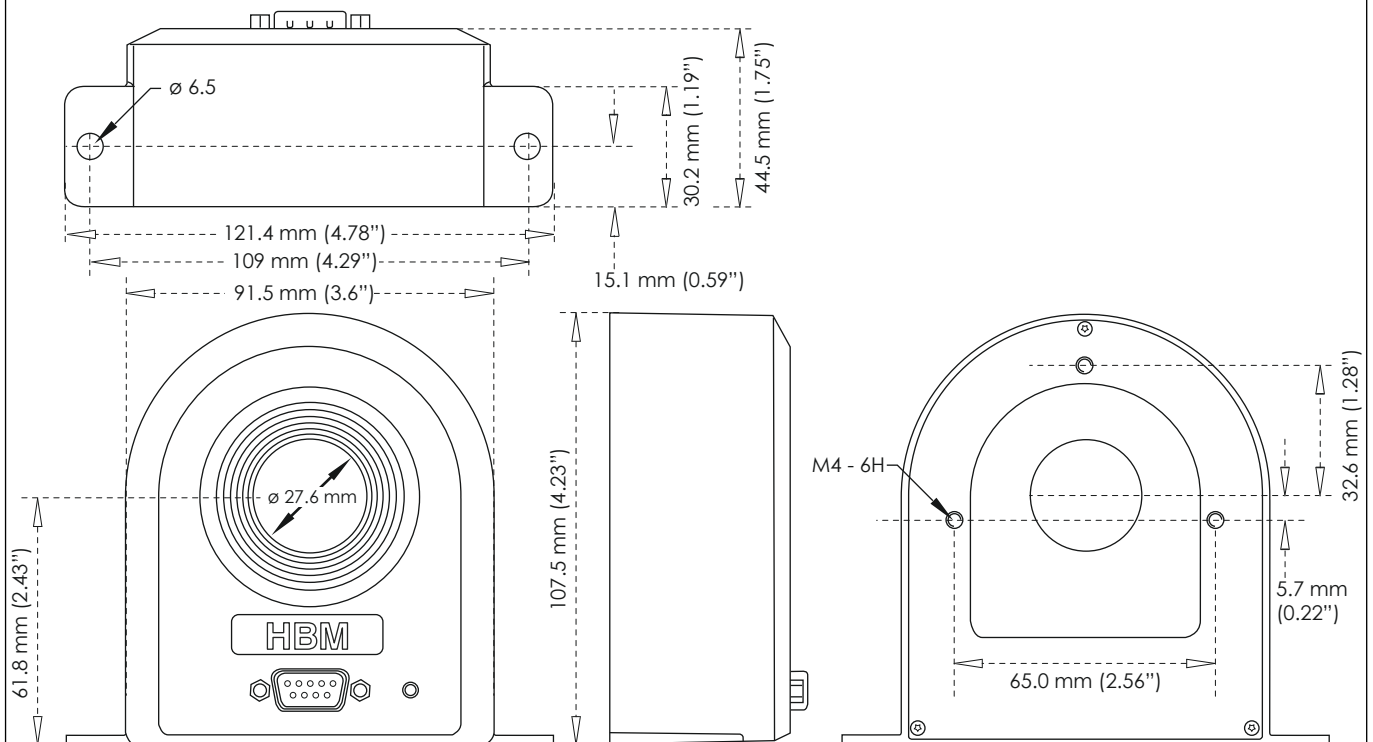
CTS50/200ID/400ID/600ID dimensions
